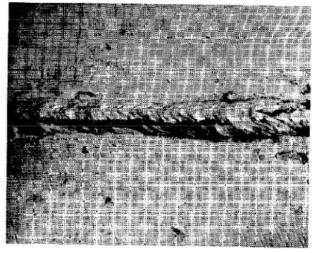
Indication of Surface Cracks (Produced by Prod Magnetization, AC Continuous)
